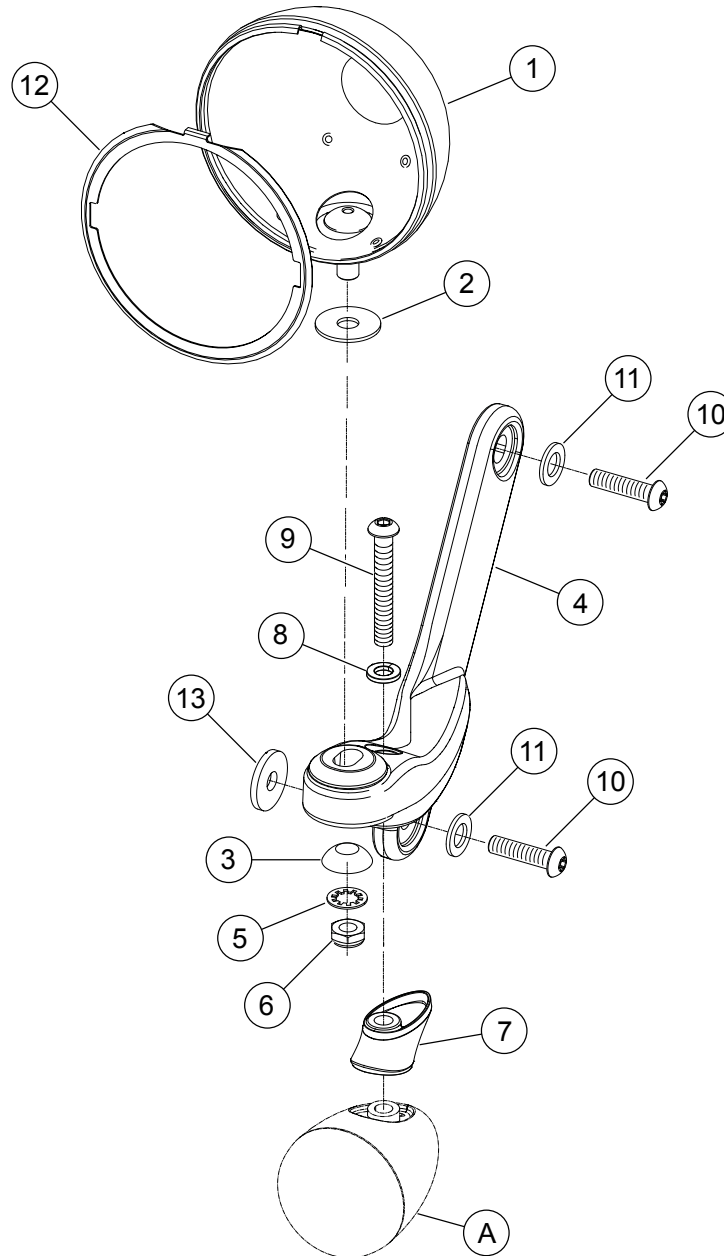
Service Parts: Custom Auxiliary Lighting Kit
